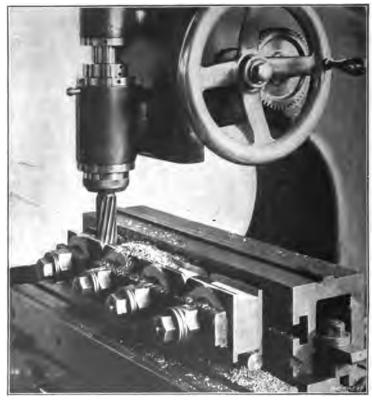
Milling Connecting-rod Bearing Brasses on Becker Vertical Machine same position. The vertical milling machine used for this operation, is not the same as the one previously illustrated, although its construction is very similar and it is used for the same class of work.
